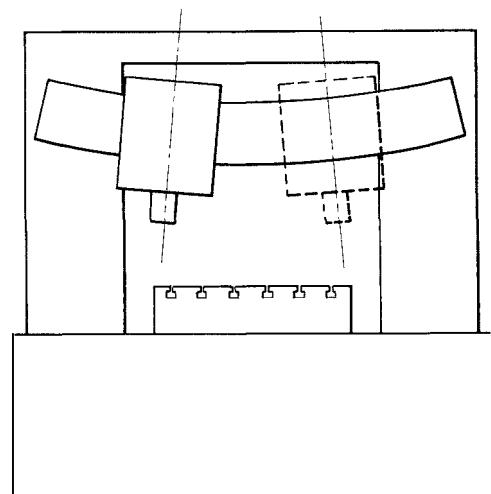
An arc in the rail of the planer-type jig borer will result in a locational error magnified with the distance of the cutting tool or indicator from the ways.
